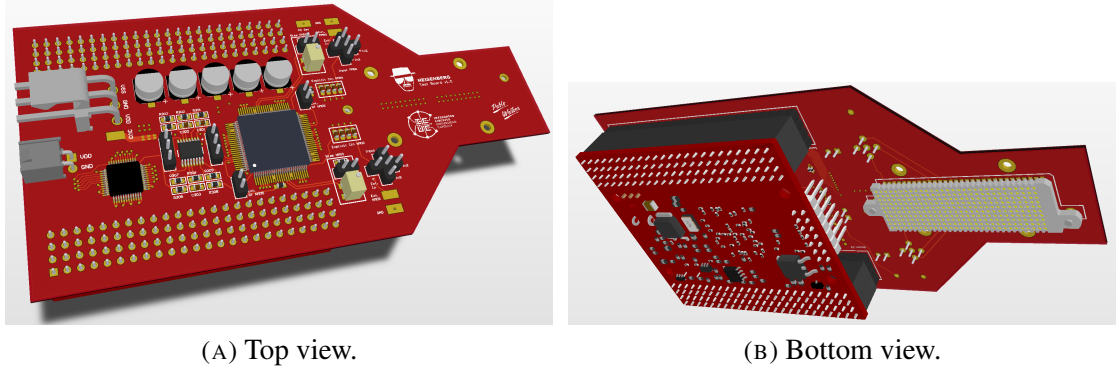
3D model of the board stack between the Heisenberg test PCB and the FPGA board.
